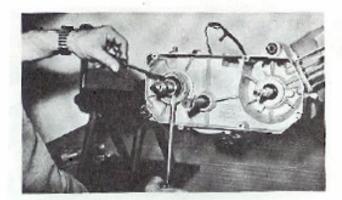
Using two screwdrivers, remove the spring washer from the driven shaft. This completes the right hand side strip down.
